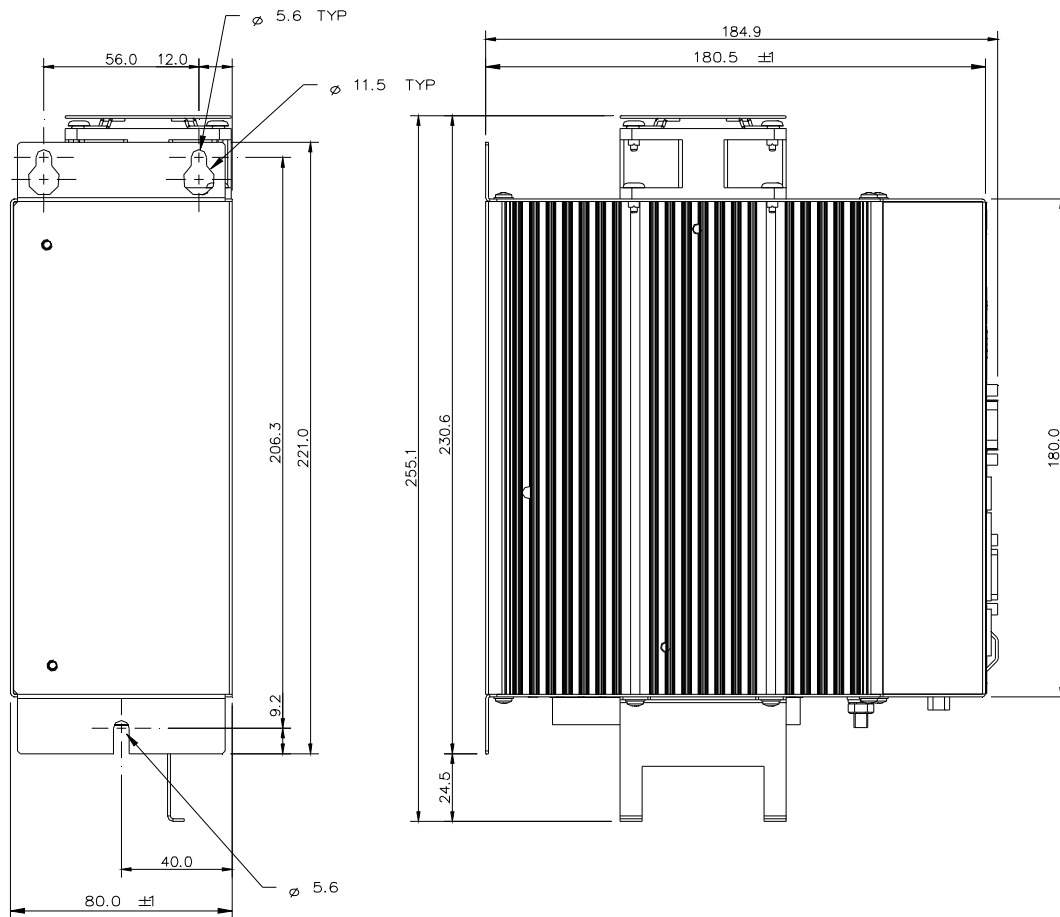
□A Size drive dimensions and drilling jig (in mm.)
